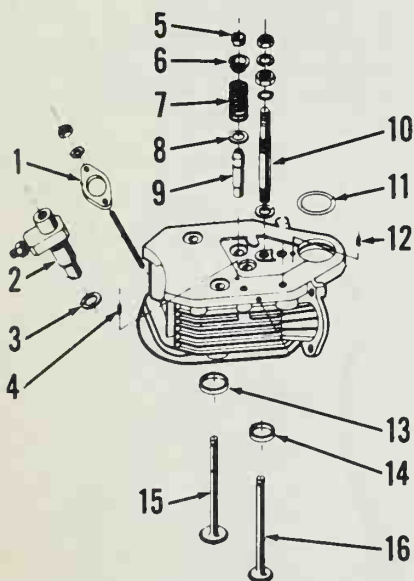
Exploded view of cylinder head. Rocker arm assembly is not shown.
